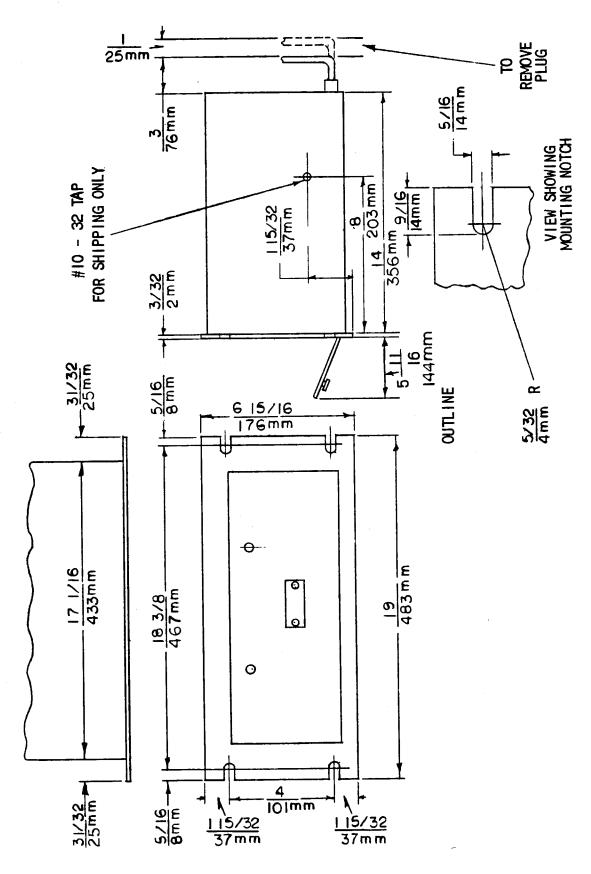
(0227A2037-0) Outline and Mounting Dimensions
